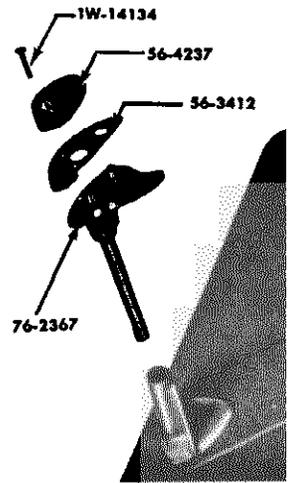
SEPARATOR-POST-ASSEMBLY REMOVAL
